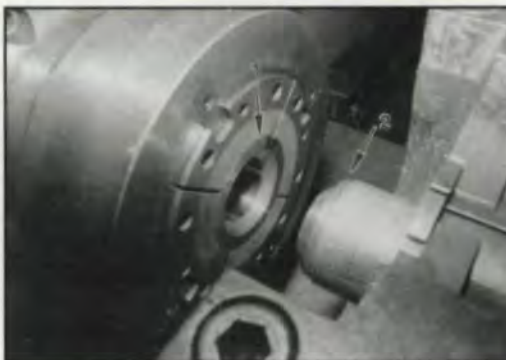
Inertia welding machine setup for welding aluminum bar to alloy steel ring.
